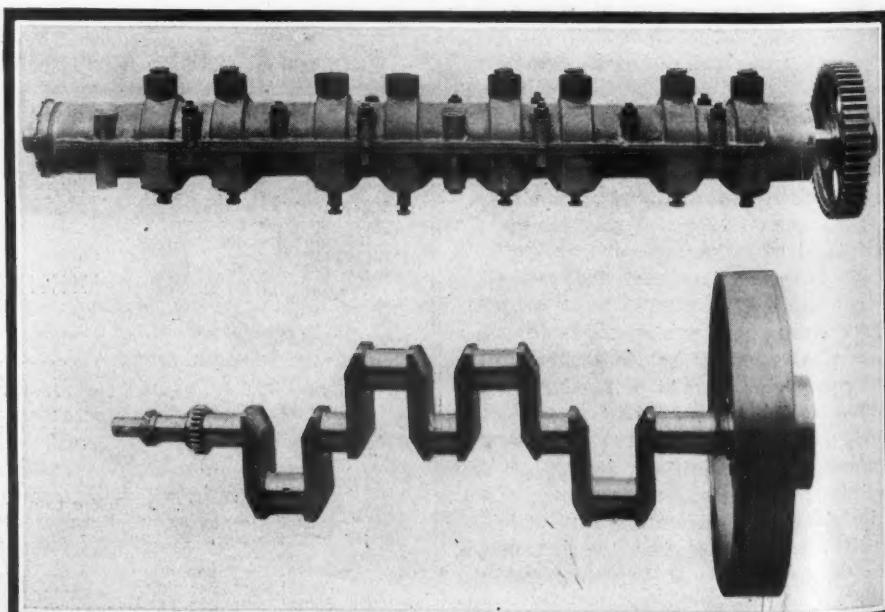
CAMSHAFT. FIG. 2—CRANKSHAFT USED ON PEUGEOT RACER
